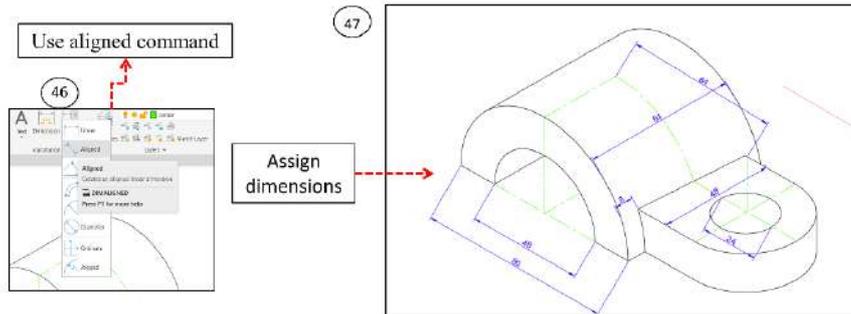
Example of an isometric drawing (Step 46 and 47)
